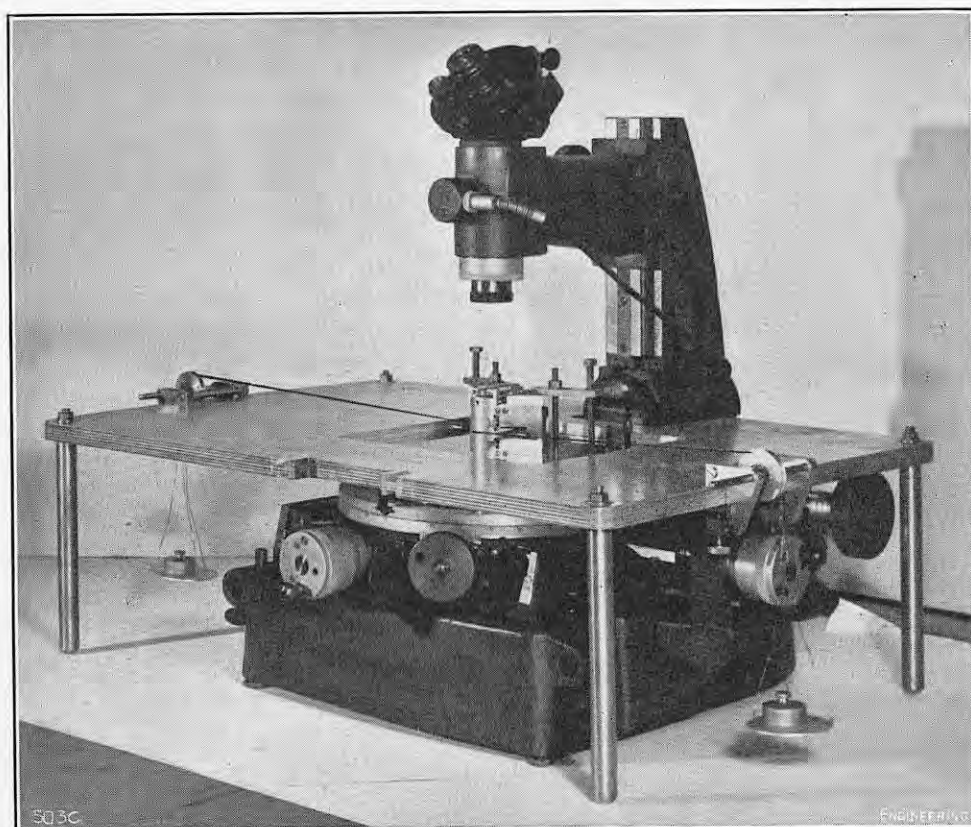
CROSS-SPRING PIVOT MOUNTED ON TOOLMAKER'S MICROSCOPE.
